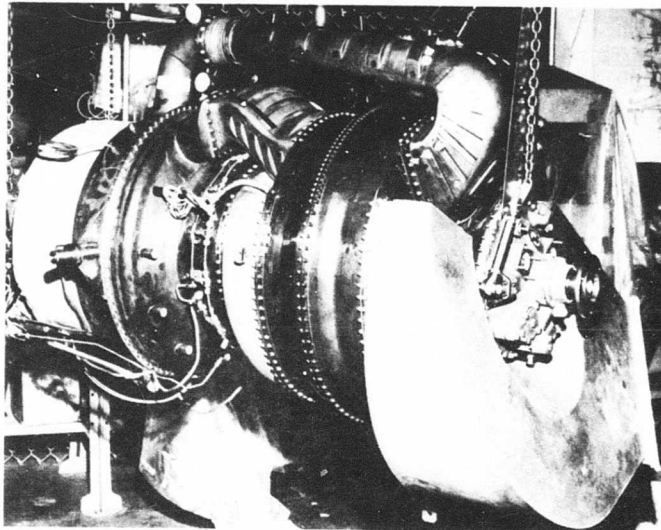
Complete Engine Assembly With Test Exhaust Duct Attached;
